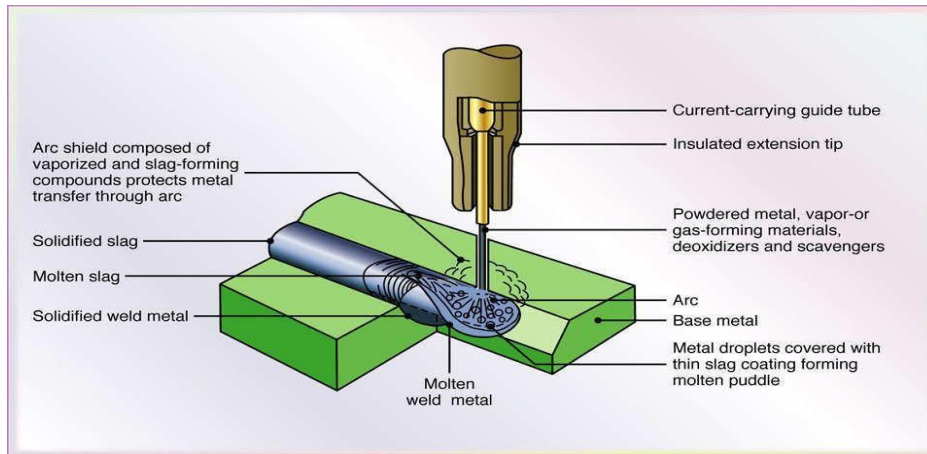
Schematic illustration of the flux-cored arc-welding process
